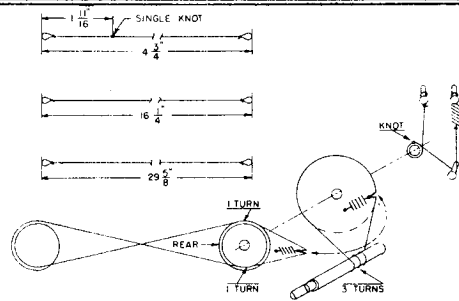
DRIVE MECHANISM ALIGNMENT
